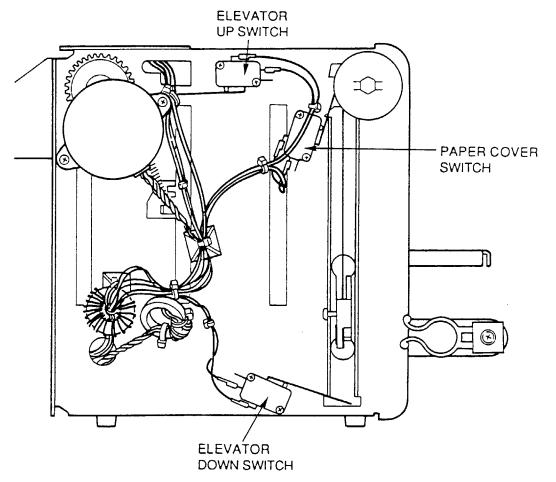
LEFT SIDE SWITCHES REMOVAL
